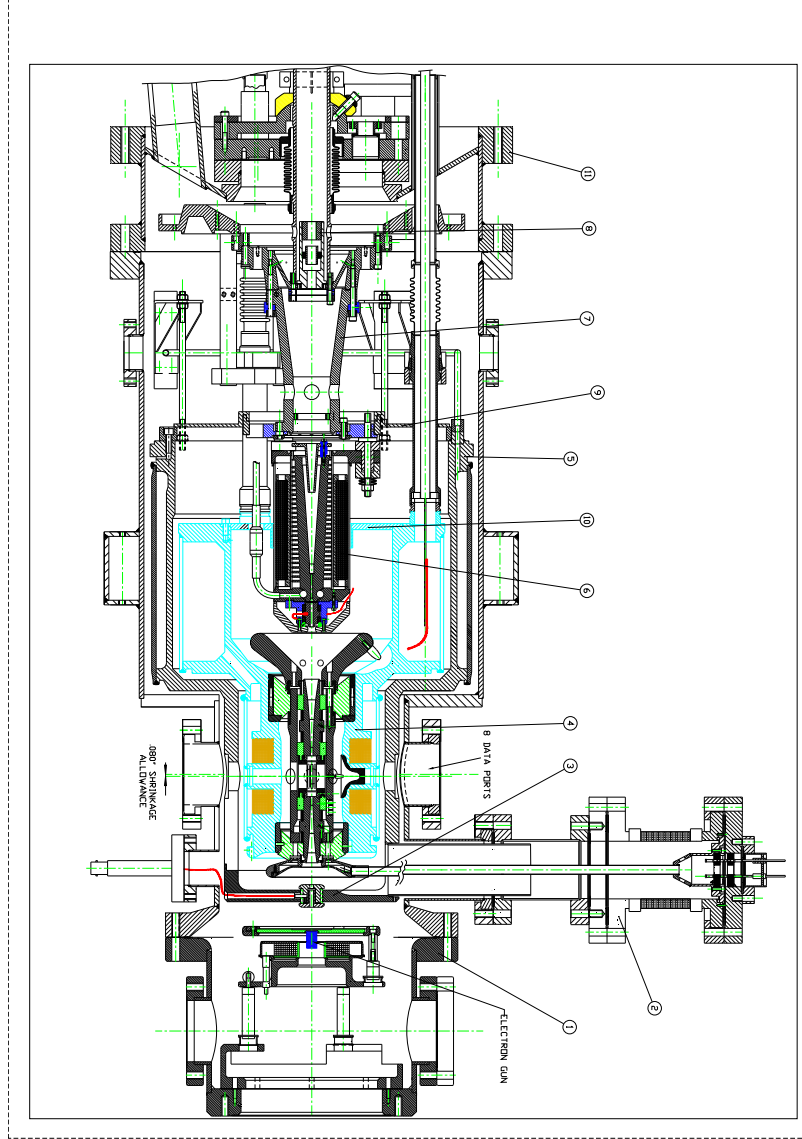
A schematic of the NIST EBIT that shows: 1. Electron gun assembly, 2. High voltage feed assembly, 3. Transition components, 4. Drift tubes assembly, 5. Liquid nitrogen vessel support, 6. Collector assembly, 7. Collector suspension assembly, 8. Einzel lens, 9. Liquid nitrogen shield, 10. liquid helium vessel, and 11. helium vessel support assembly. From [RR99].
